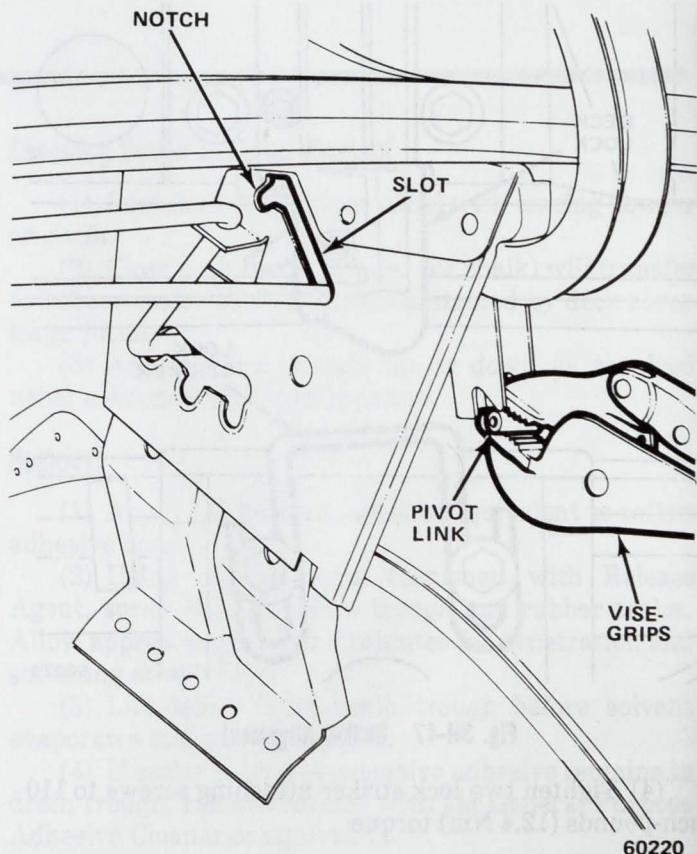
H-51 Torsion Rod Removal—Nonadjustable End
